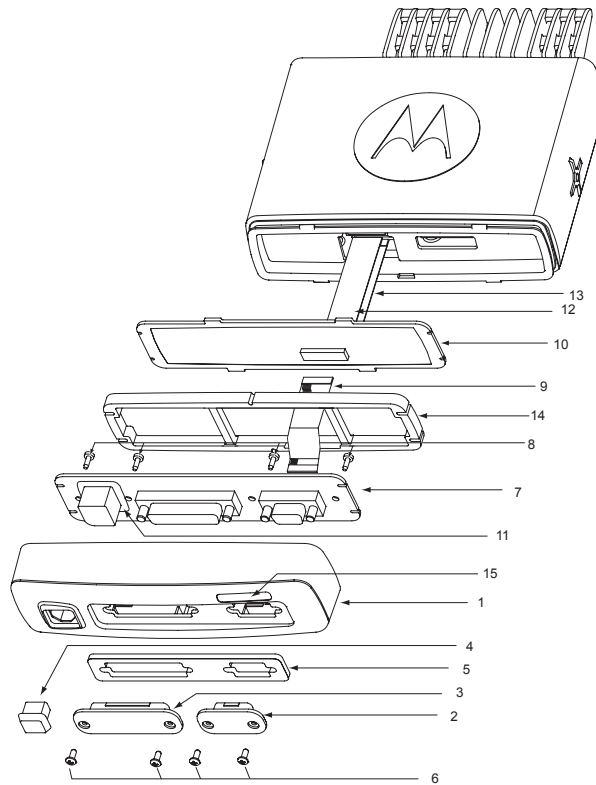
Data Expansion Head Enhanced – Exploded View
